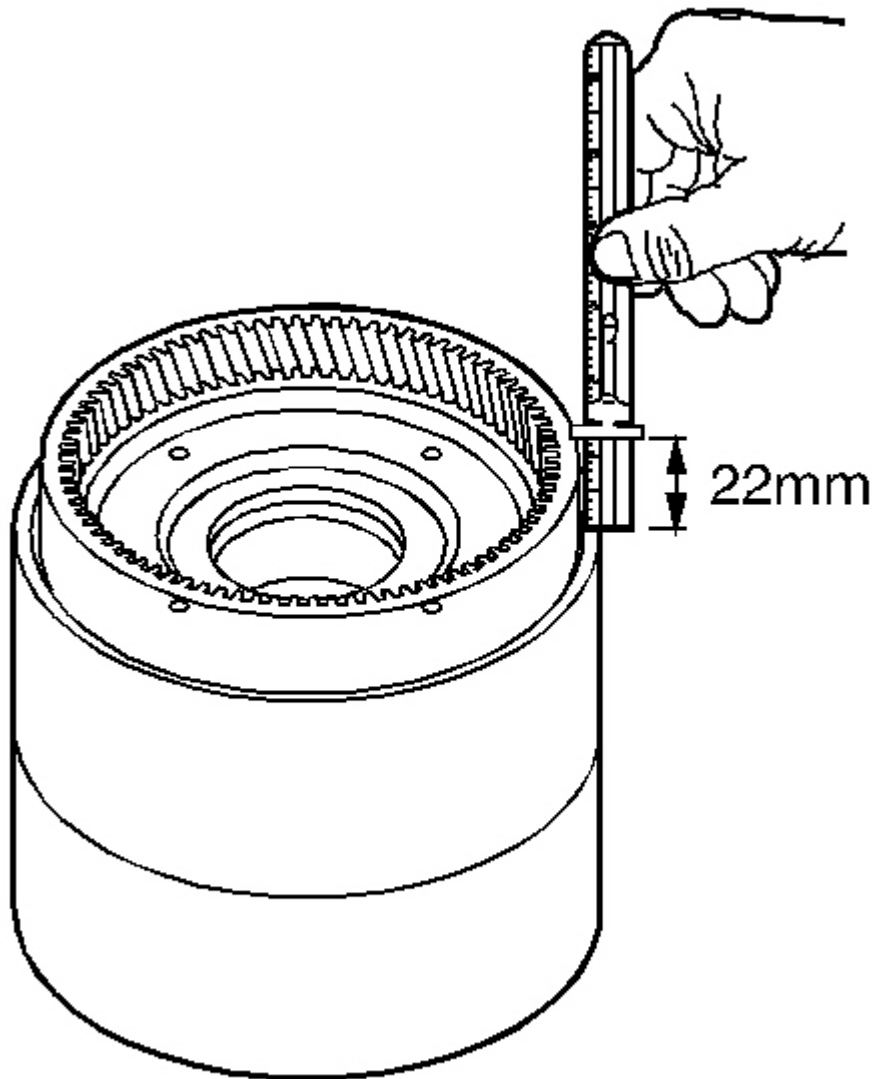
Measuring Input Carrier And Reaction Internal Gear To Edge Of The Input Internal Gear
